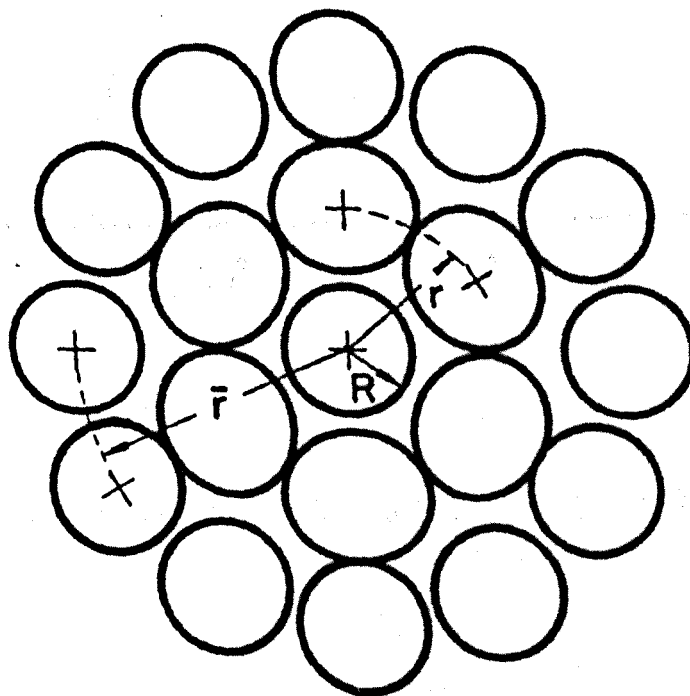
CROSS-SECTION OF A 1X19 ROPE SHOWING SOME OF THE WIRES.
